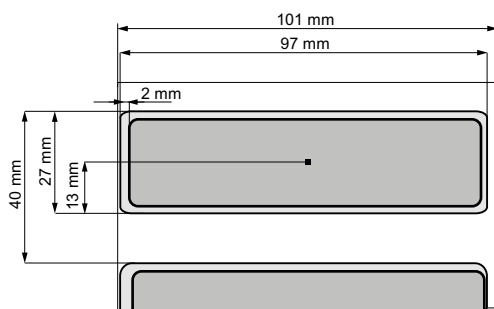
Dimension drawing SIMATIC RF630L 6GT2810-2AB02-0AX0
